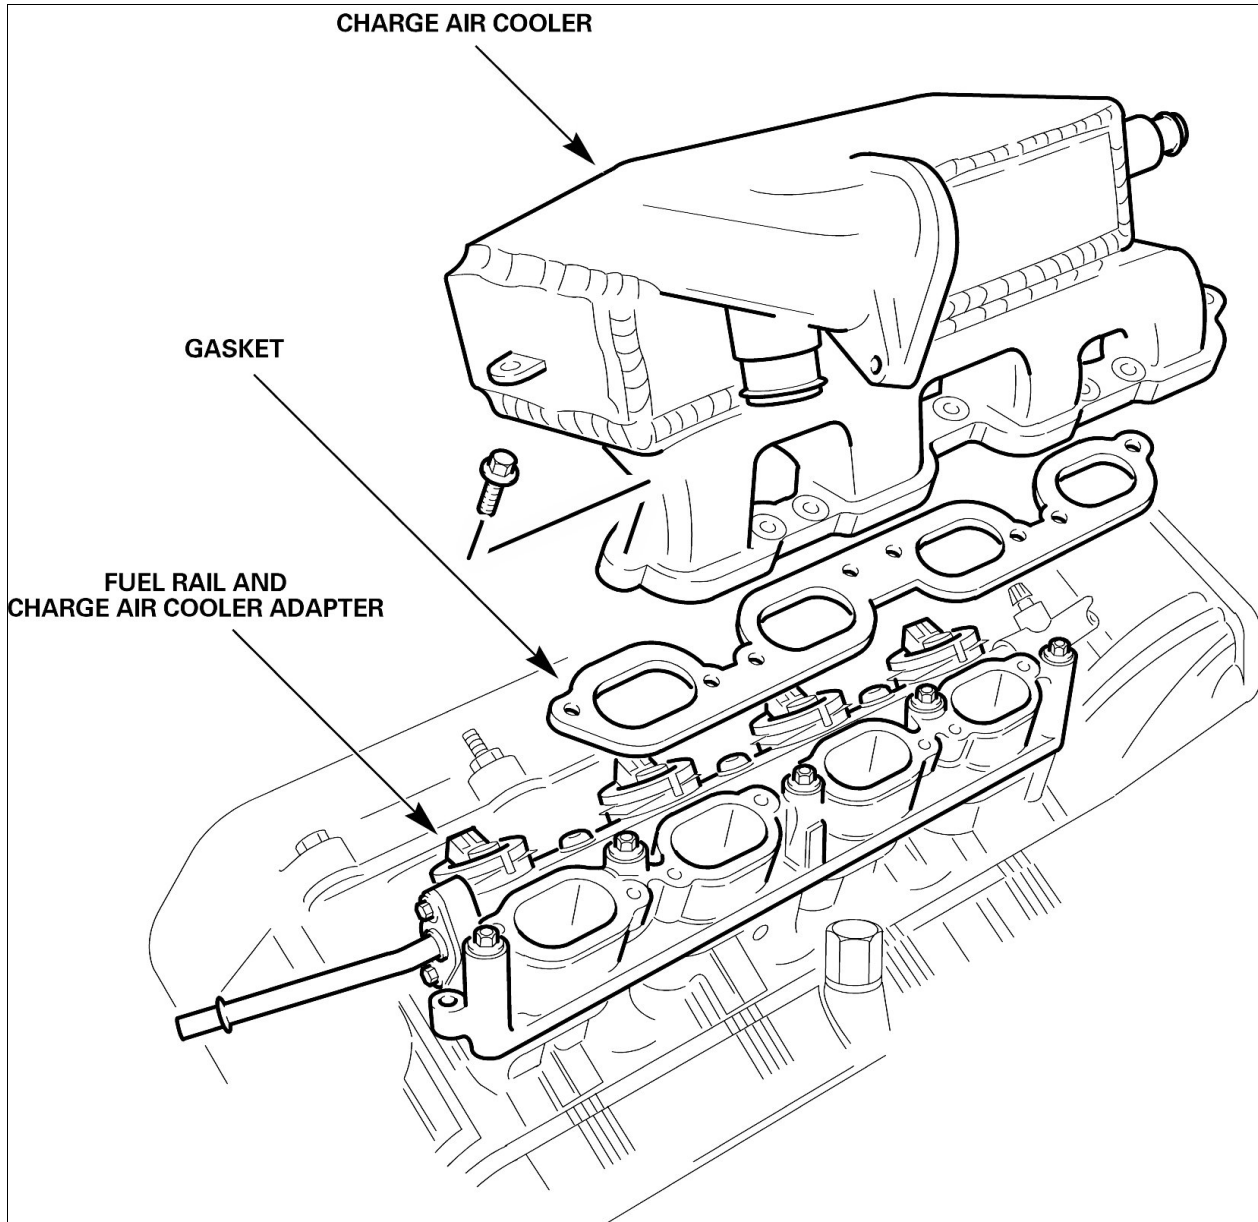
SUPERCHARGER CHARGE AIR COOLER, ADAPTER AND FUEL RAIL
